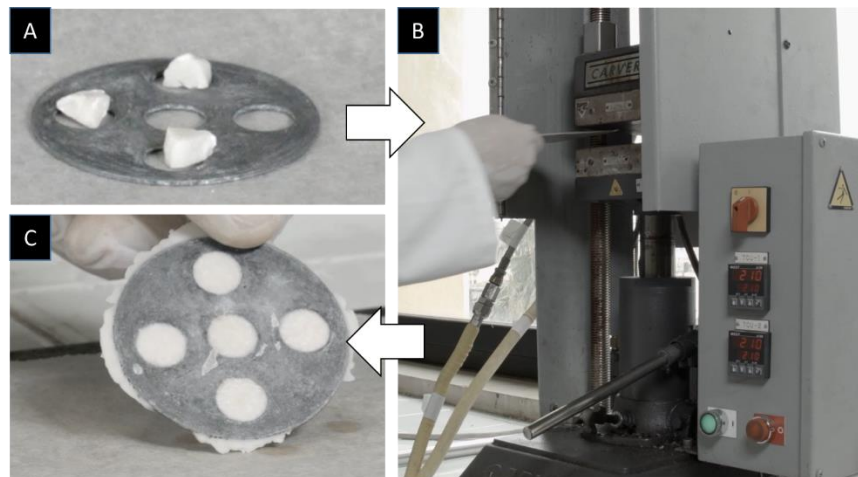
A) Mold and blend before compression molding; B) Laboratory press (Carver, USA); C) Mold and blend after compression molding
